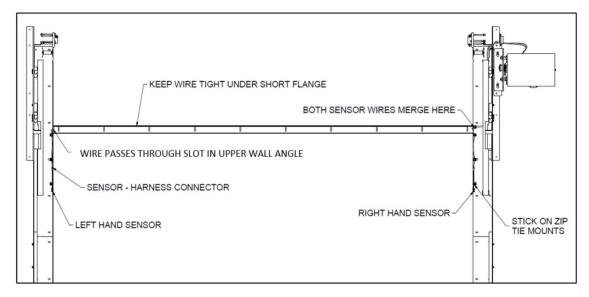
SENSOR WIRING PLACMENT DIAGRAM (RIGHT-HAND MOUNTED OPERATOR SHOWN)
